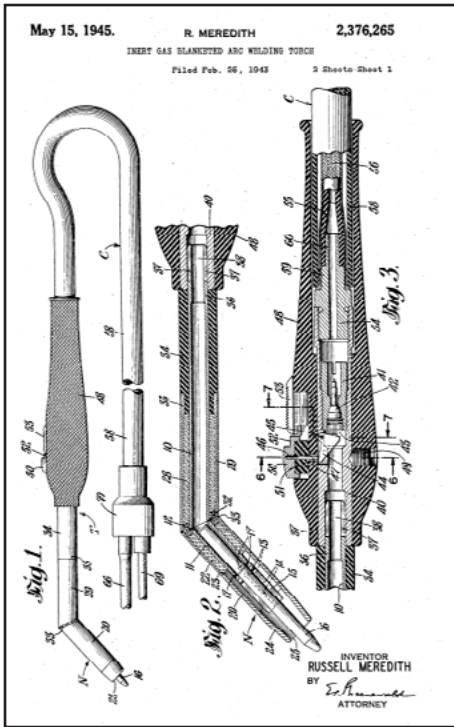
Patent by R. Meredith; no. 2376265 “Inert gas blanketed arc welding torch” 15.05. 1945 [22]
